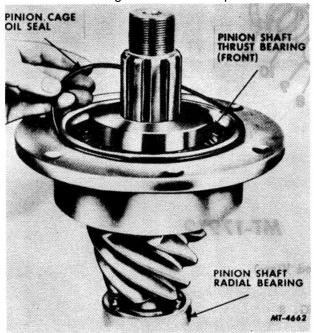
Removing Pinion Cage Oil Seal CLEANING, INSPECTION AND REPAIR
